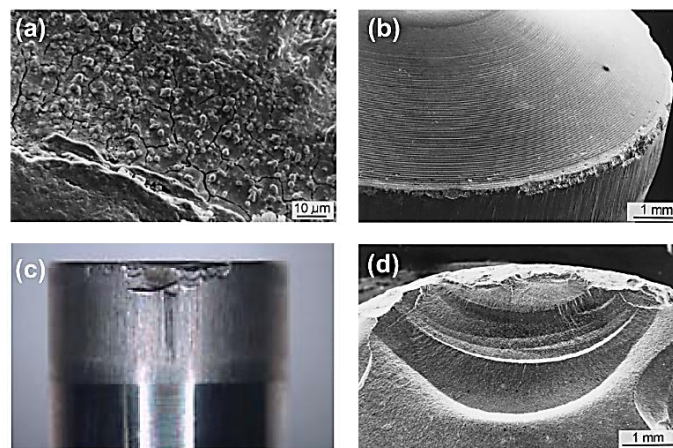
(a) Micro-cracks produced on the face of the worn cutting edge, (b) micro-chipping on the punch edge, (c) chipping wear on the punch cutting edge, and (d) gross fracture on the worn cutting edge [18], [57].
